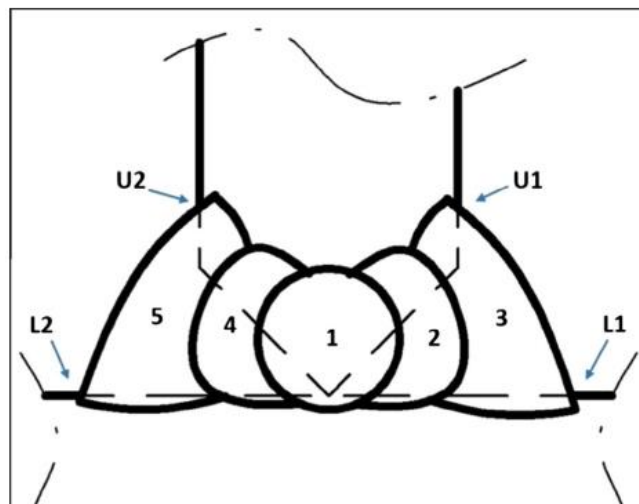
The welding sequence with five beads. The upper (U1 and U2) and lower weld toes (L1 and L2) in the first and second welded sides are also shown.
